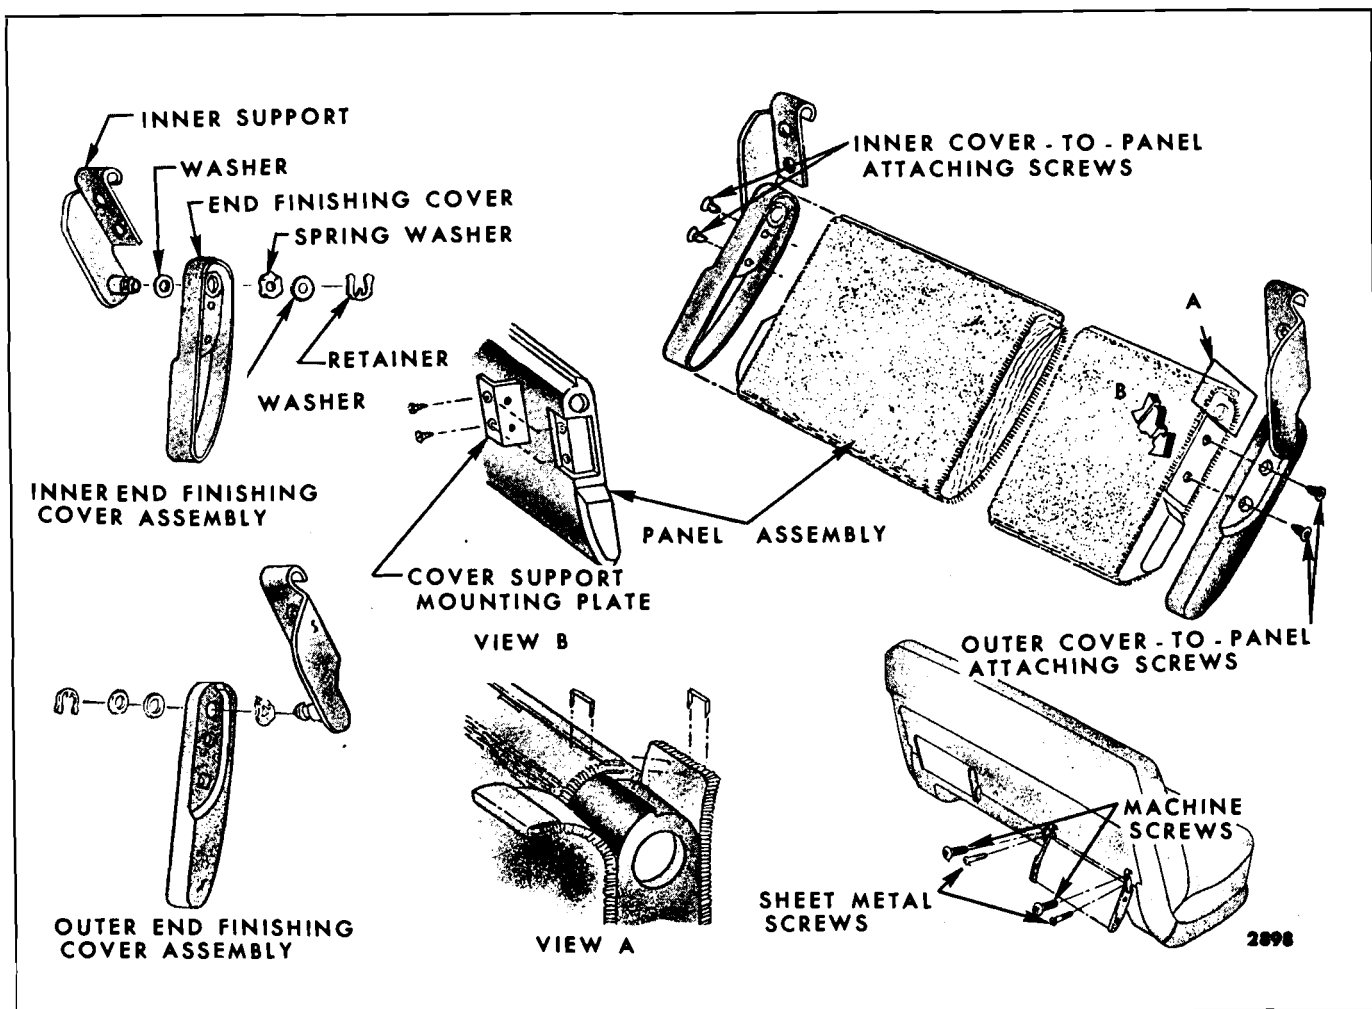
Foot Rest Assembly - Cadillac 68169 Styles
